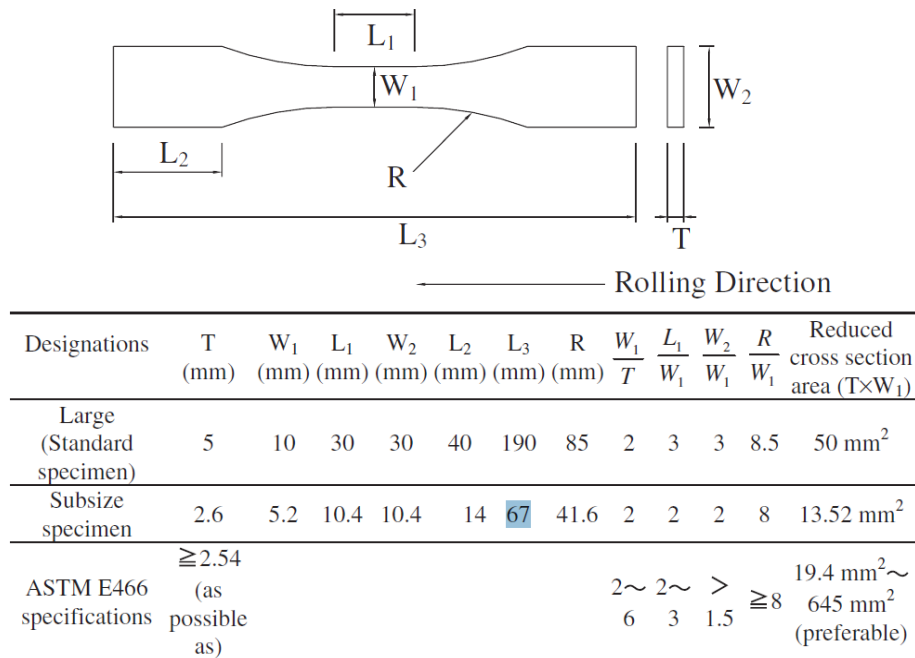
Dimensions of standard of high-cycle fatigue specimens
